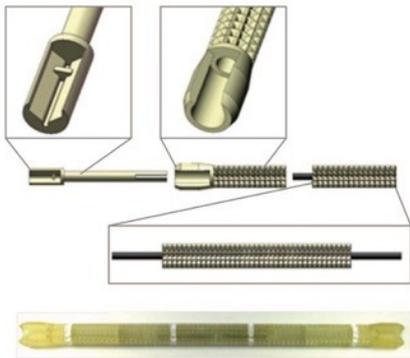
Assembly of a rod with the female part of lockable connector and photo of 3D printed connector node (Nigl et al., 2013)
